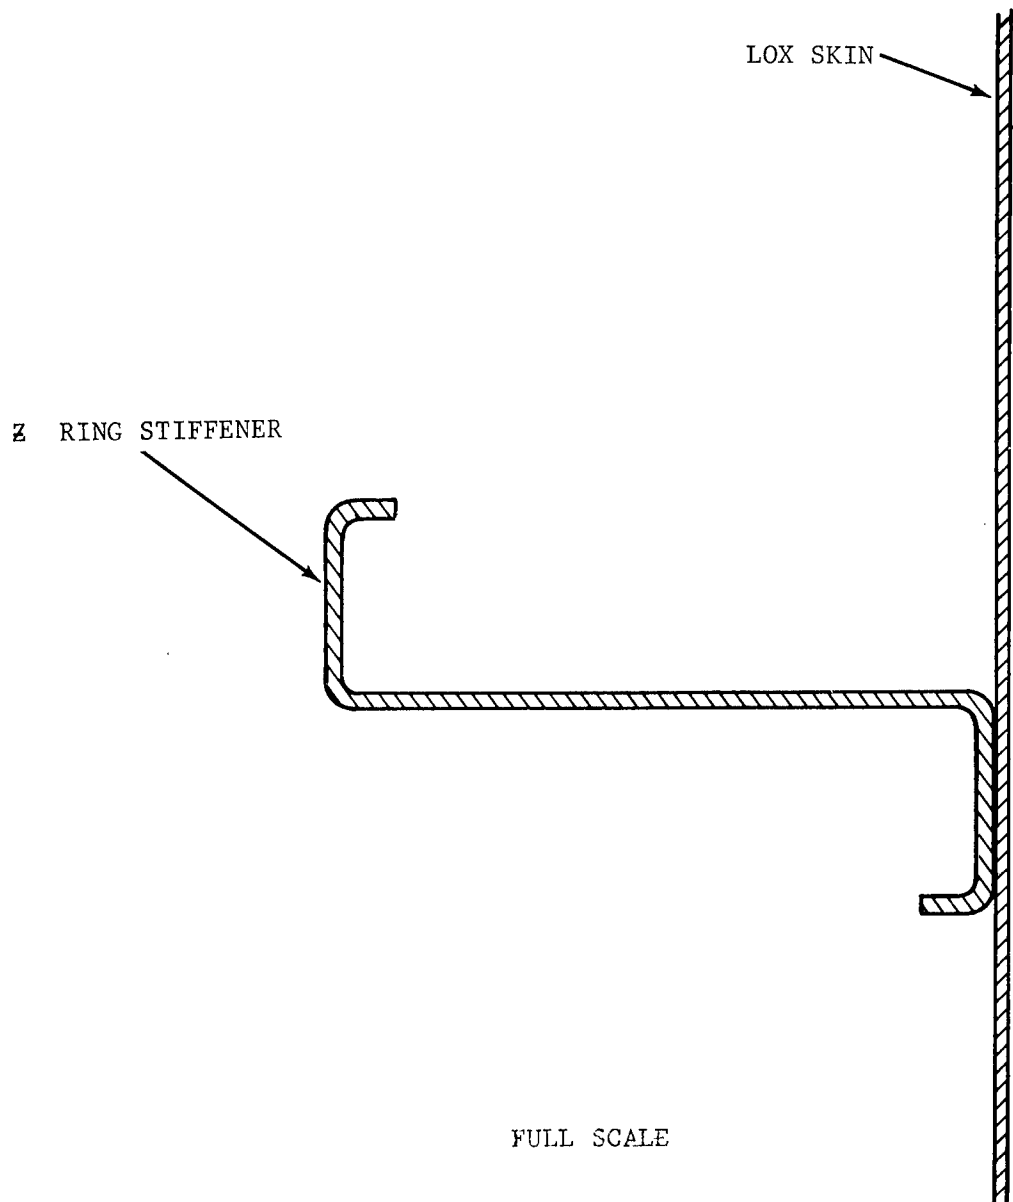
CROSS SECTION OF SKIN PANEL AND RING STIFFENER
